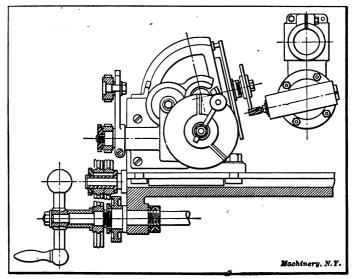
Diagrammatical View showing Method of Milling Cams on the Milling Machine
